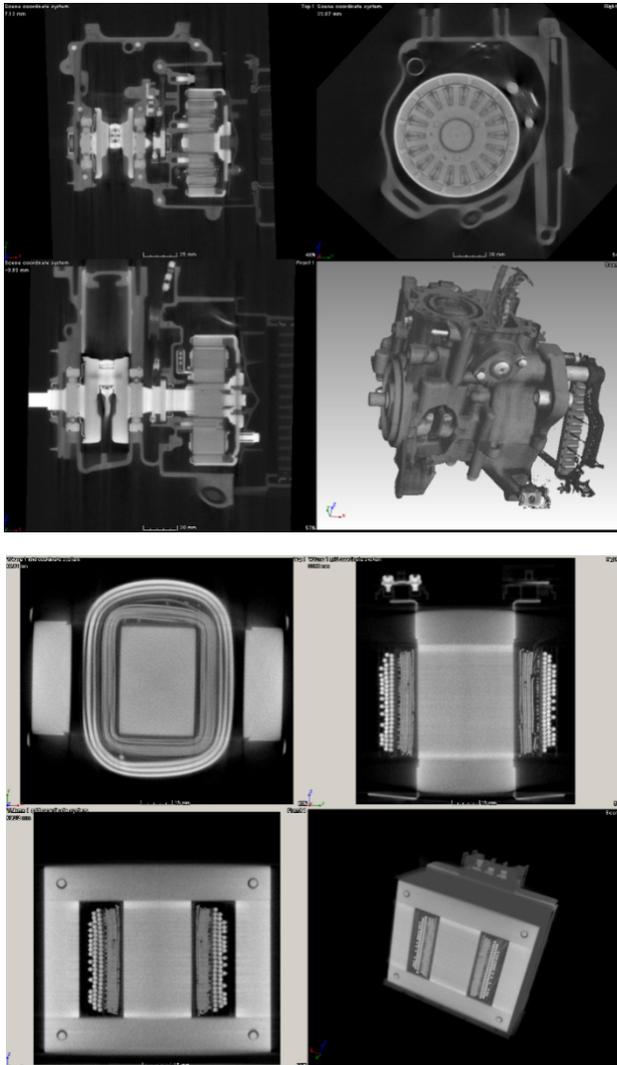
Top is cross sections of a motor engine. Bottom is a 30cm wide trans.
